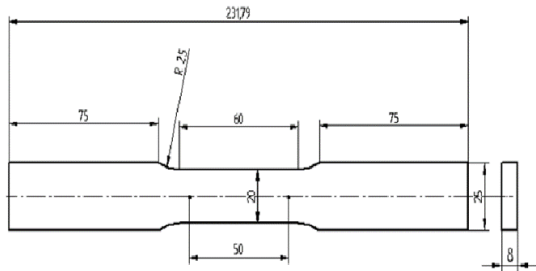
Aluminium specimen Dimensions as per ASTM 8/E 8M-08.
